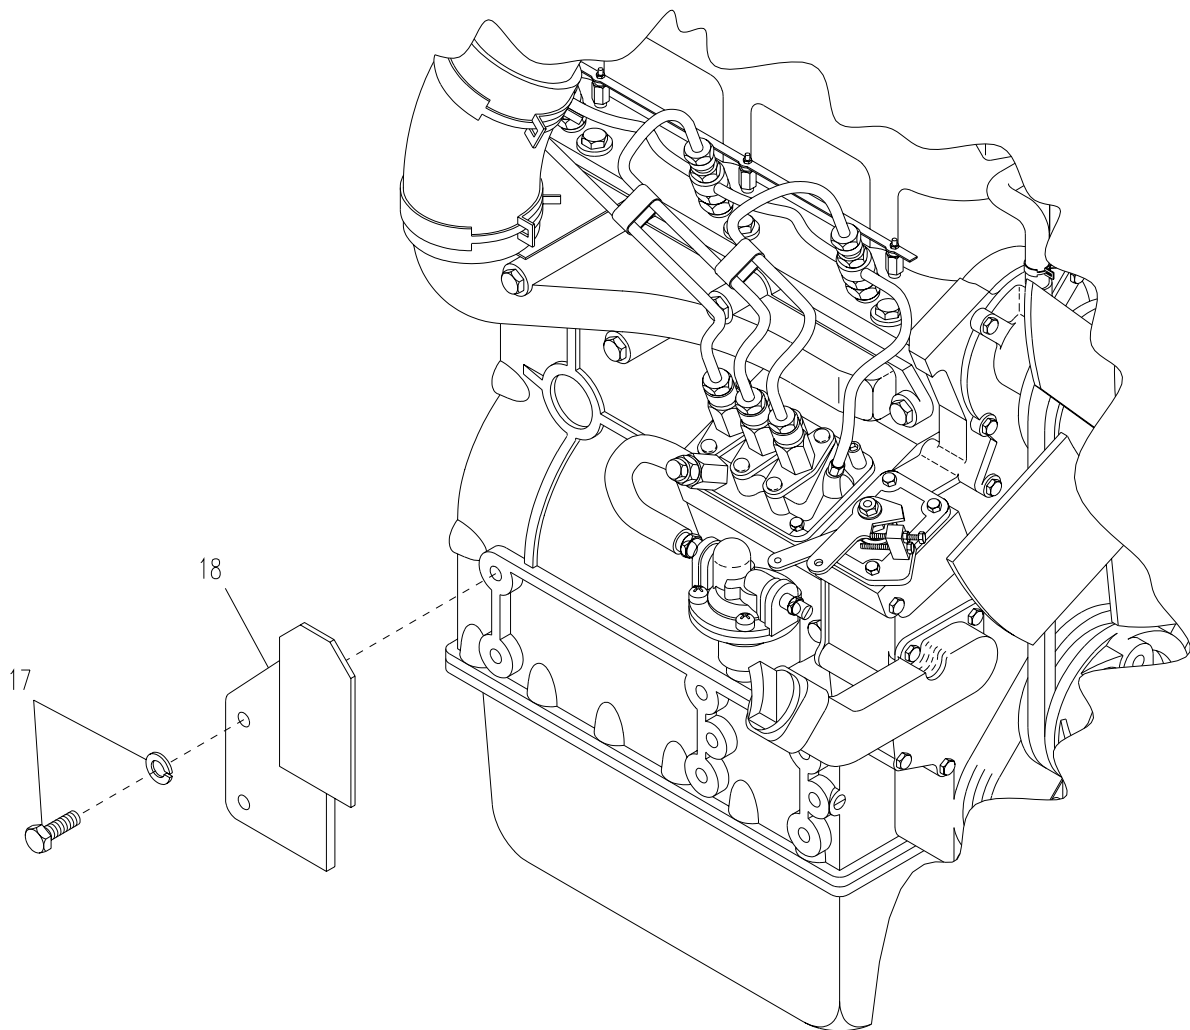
Diesel Engine (Sheet 6 of 11)
